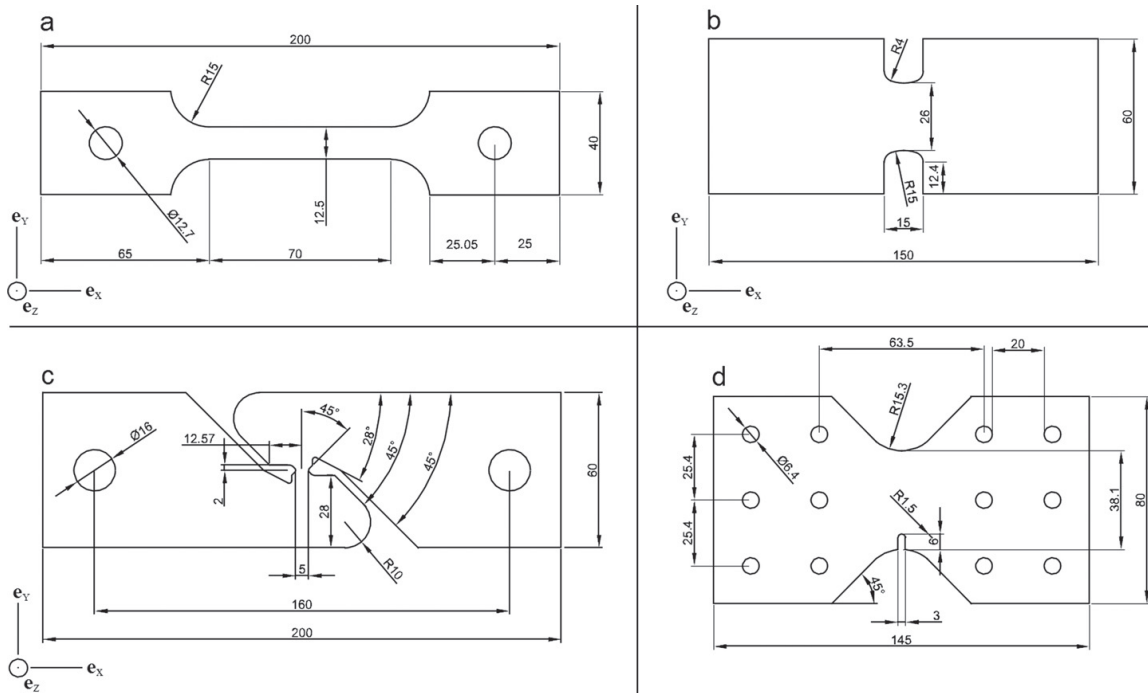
Geometry of the test specimens (in mm): (a) uniaxial tension specimen, (b) plane-strain tension specimen, (c) in-plane shear specimen and (d) modified Arcan specimen [25].
